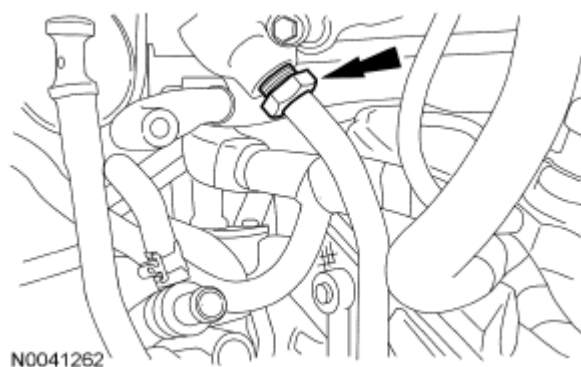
Locating EGR Tube-To-EGR Valve Nut
